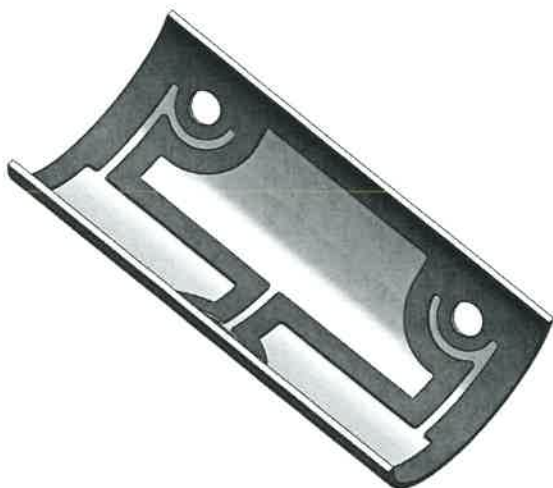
CAD model of the hydrostatic bearing in its formed state
